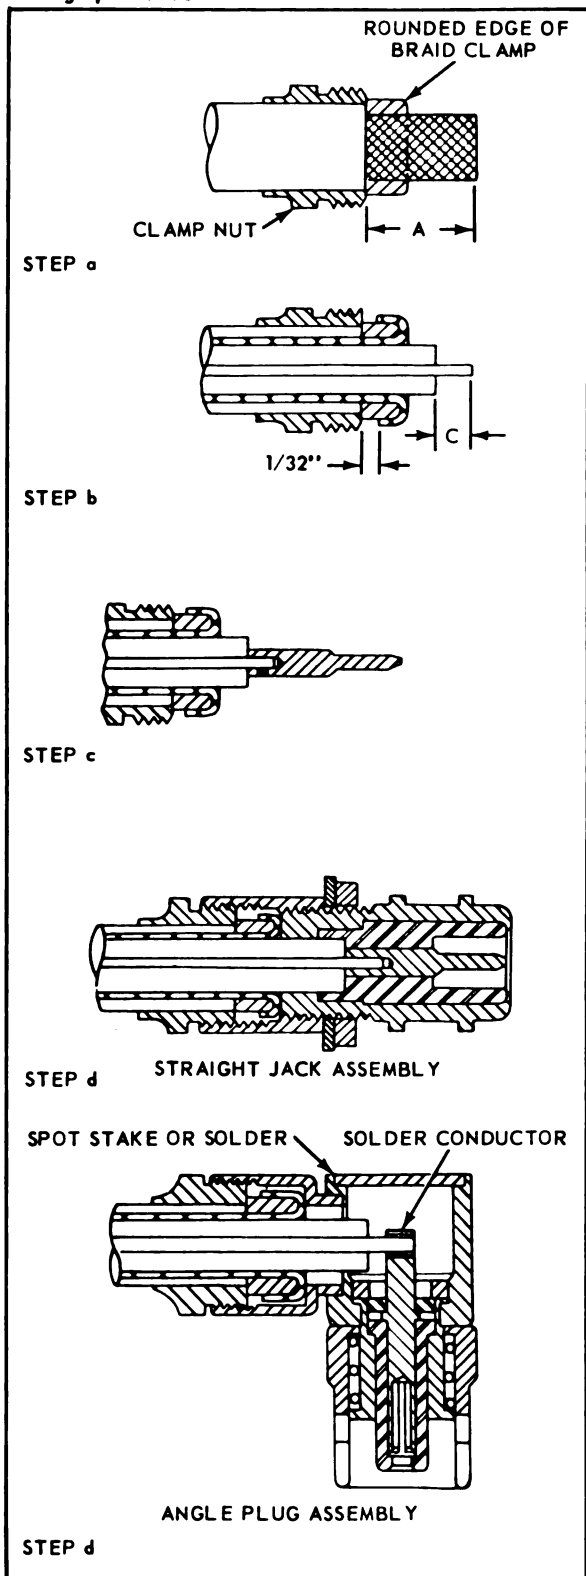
Attaching MB Connectors to Coaxial Cable
